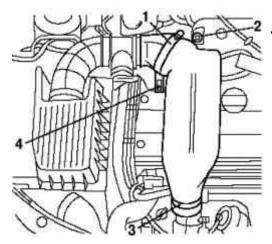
Mounting inlet pipe: 1, 3, 4 - clamps, 2 - screw fixing
